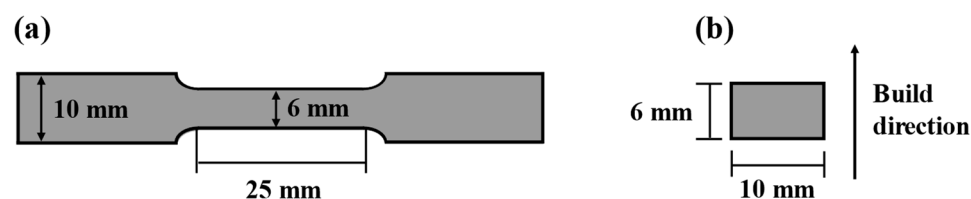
(a) Top view and (b) cross-sectional view of the grip section of the tensile specimens used in this study.
